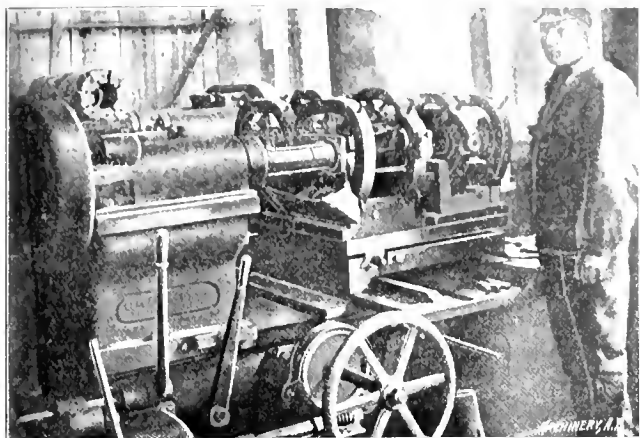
Boring out Cylinders on a Beaman & Smith Machine
